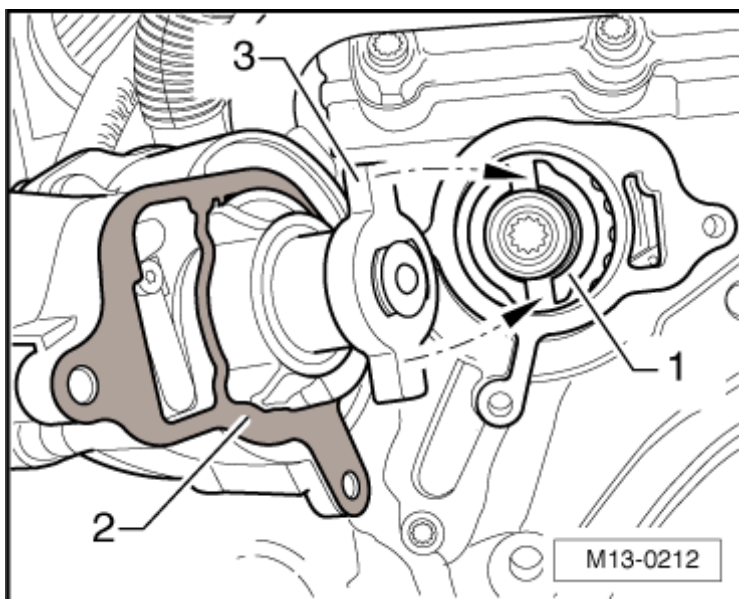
Identifying New Gasket On Placed On Vacuum Pump
